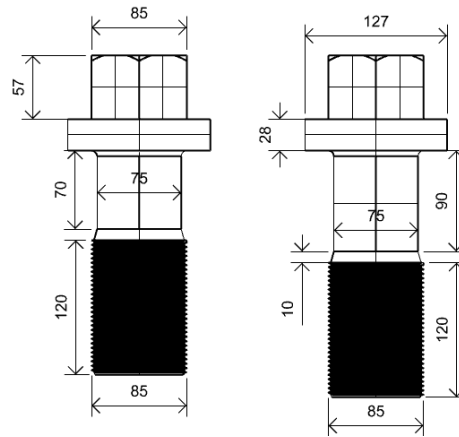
Dimensions of blade bolts (All dimensions are in millimeter.)
